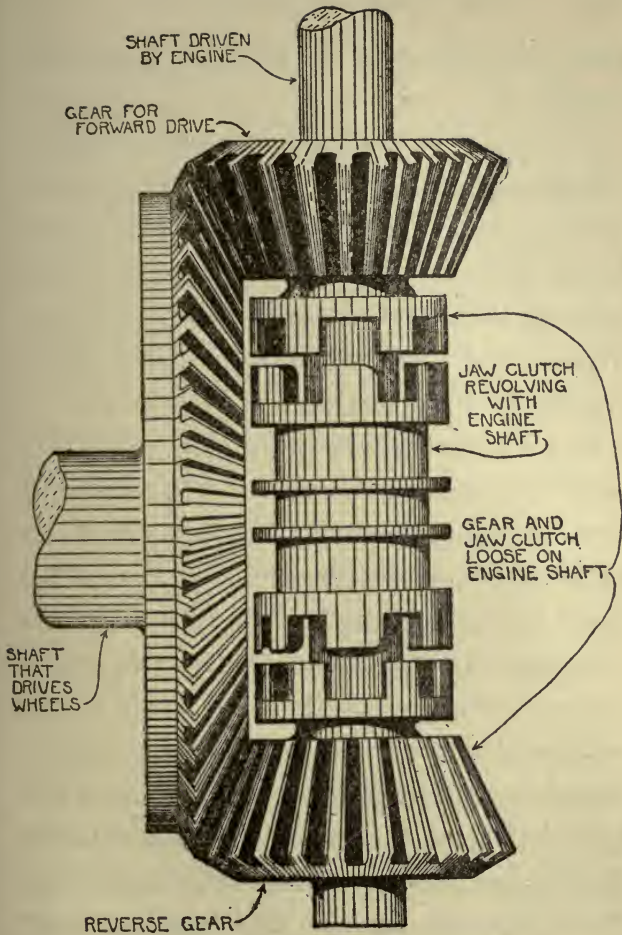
PRINCIPLE OF JAW CLUTCH CHANGE SPEED GEAR
